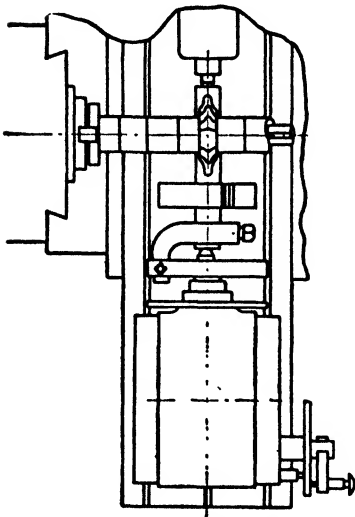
Plain Milling Machine Set-up for Cutting Spur Gear.
